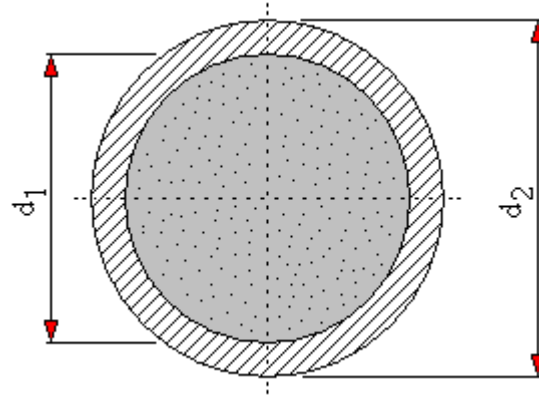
Cross-section of a solid-tube flux-cored wire
